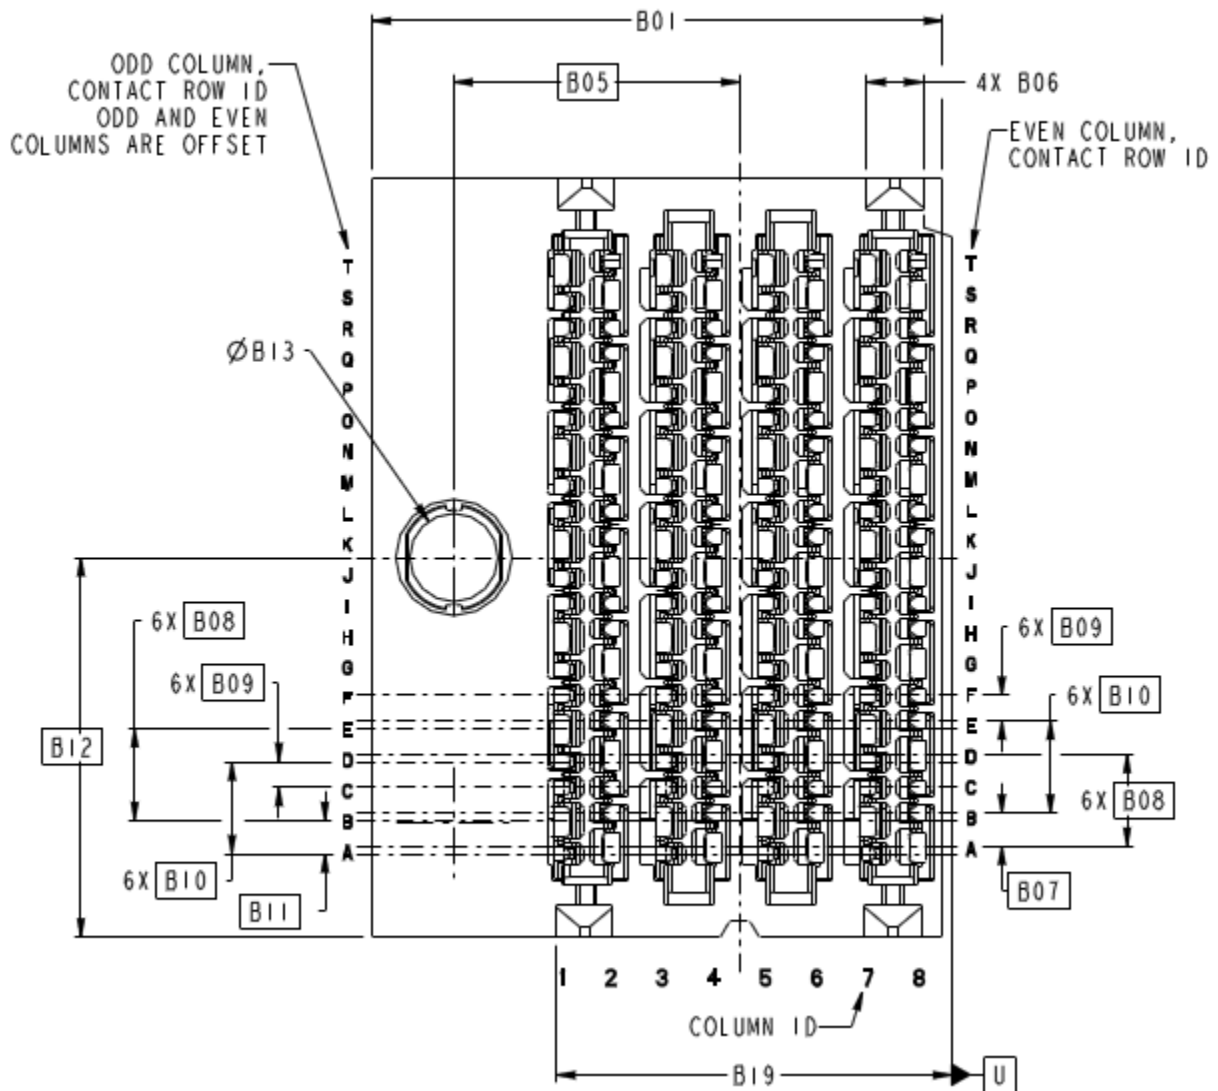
Right Angle Header Right Guidance Connector Front View
